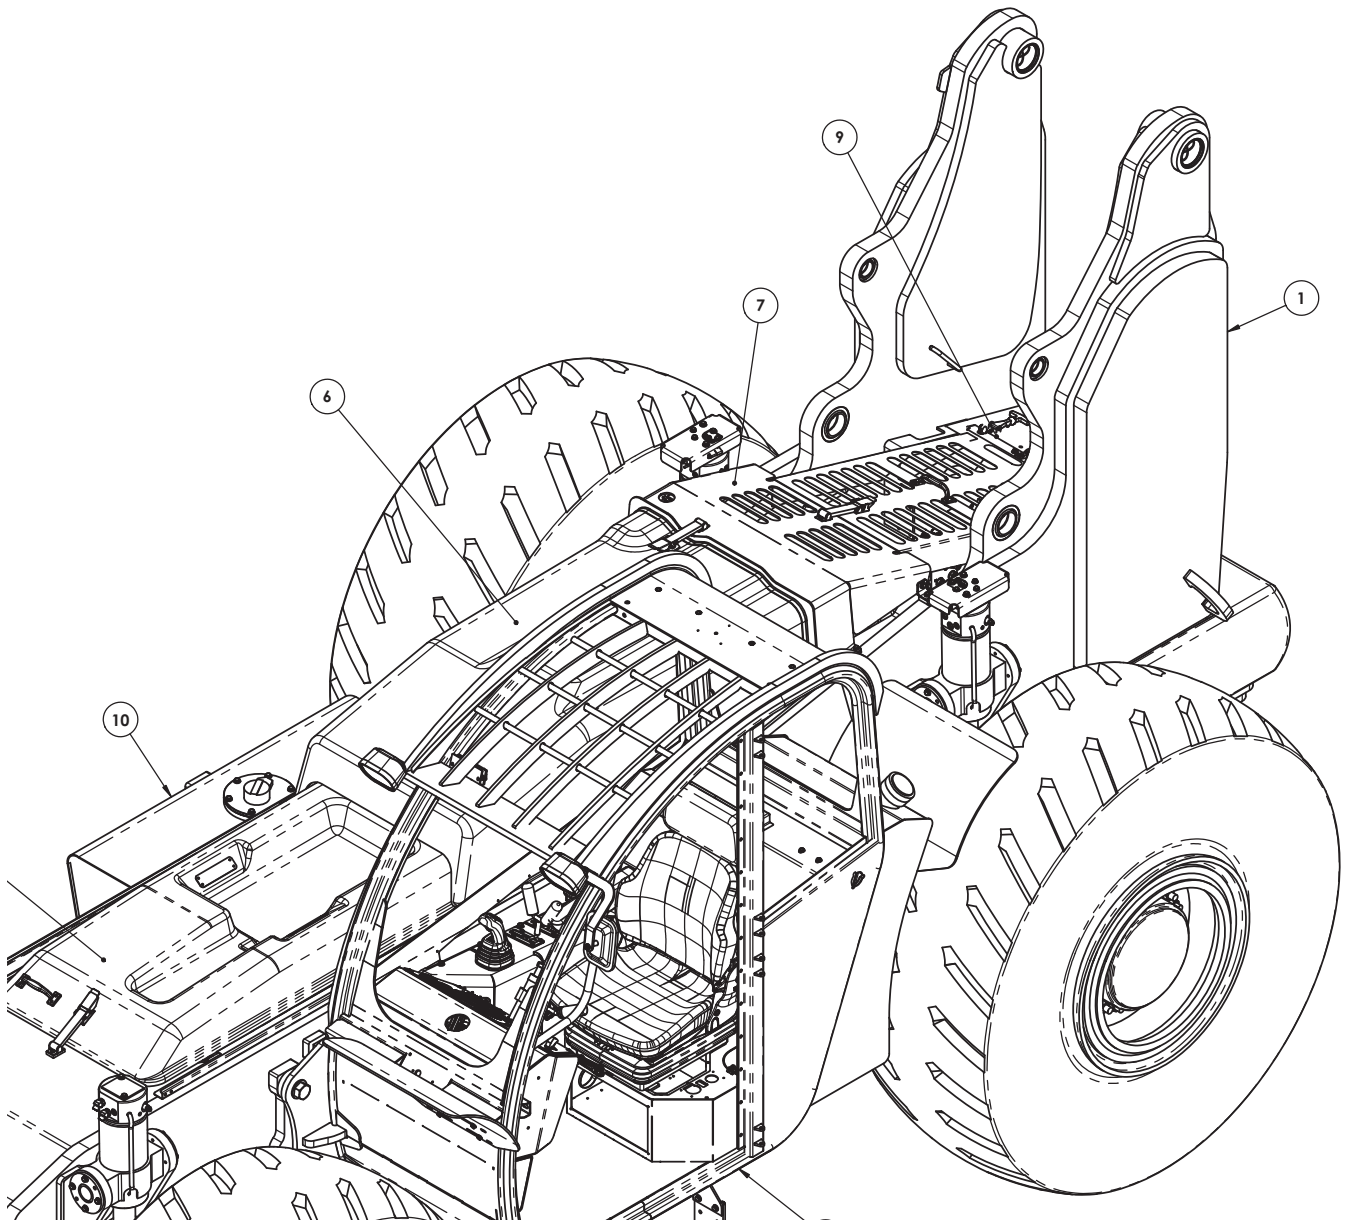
CHASSIS ASSEMBLY - CAB & COVERS (32002-000)
